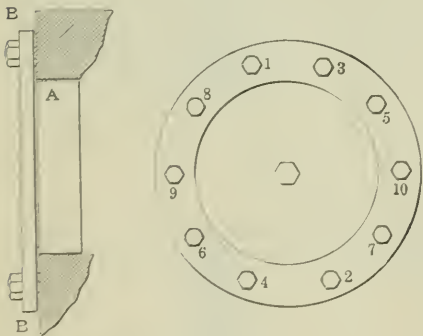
TIGHTENING UP A CYLINDER HEAD
